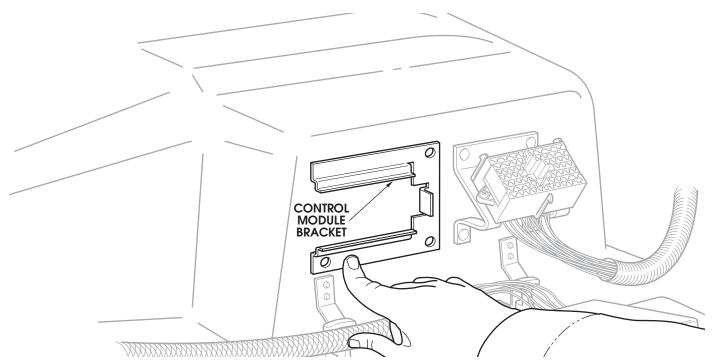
ELockerELocker control module bracket mounted on the engine cover.
